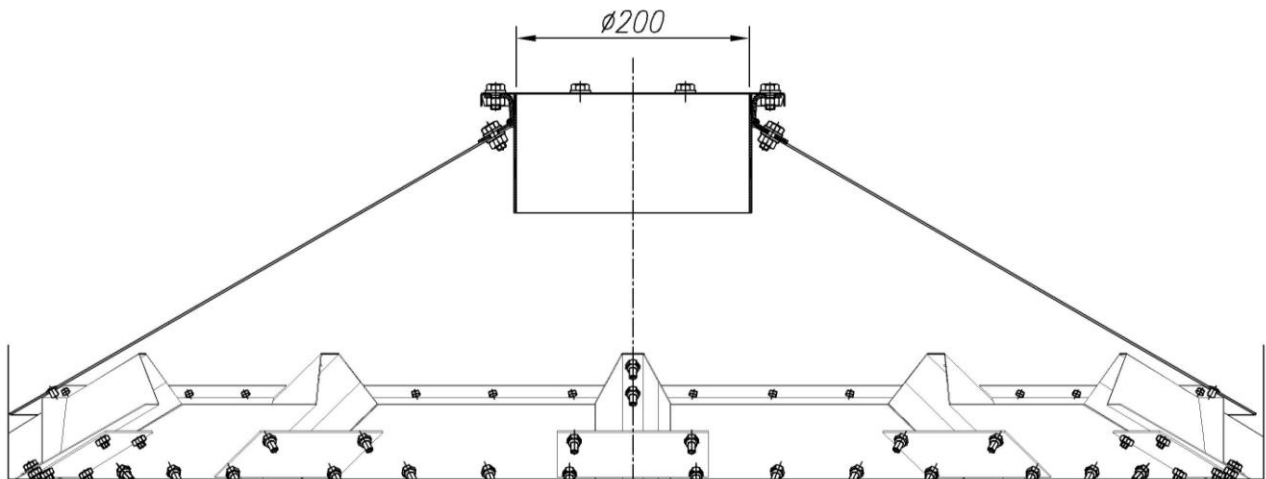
A diagram showing a central loading inlet together with conditions and options for connecting loading equipment.
